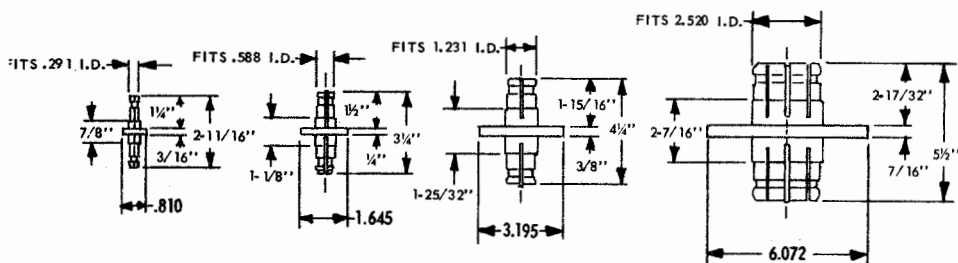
Inner Coupling (Bullet) Dimensions for Rigid Coaxial Transmission Line
